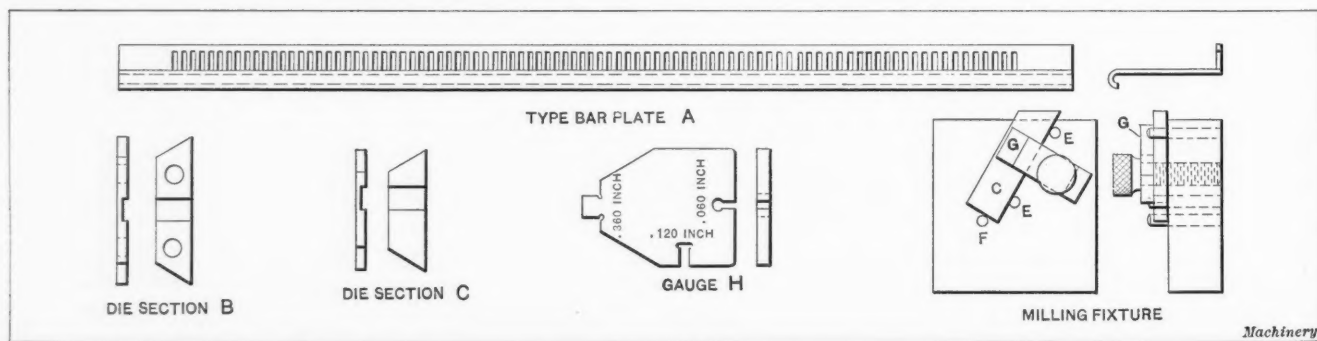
Type Bar Plate A, Die Sections B and C, Gage H, and Milling Fixture for making Die Sections
